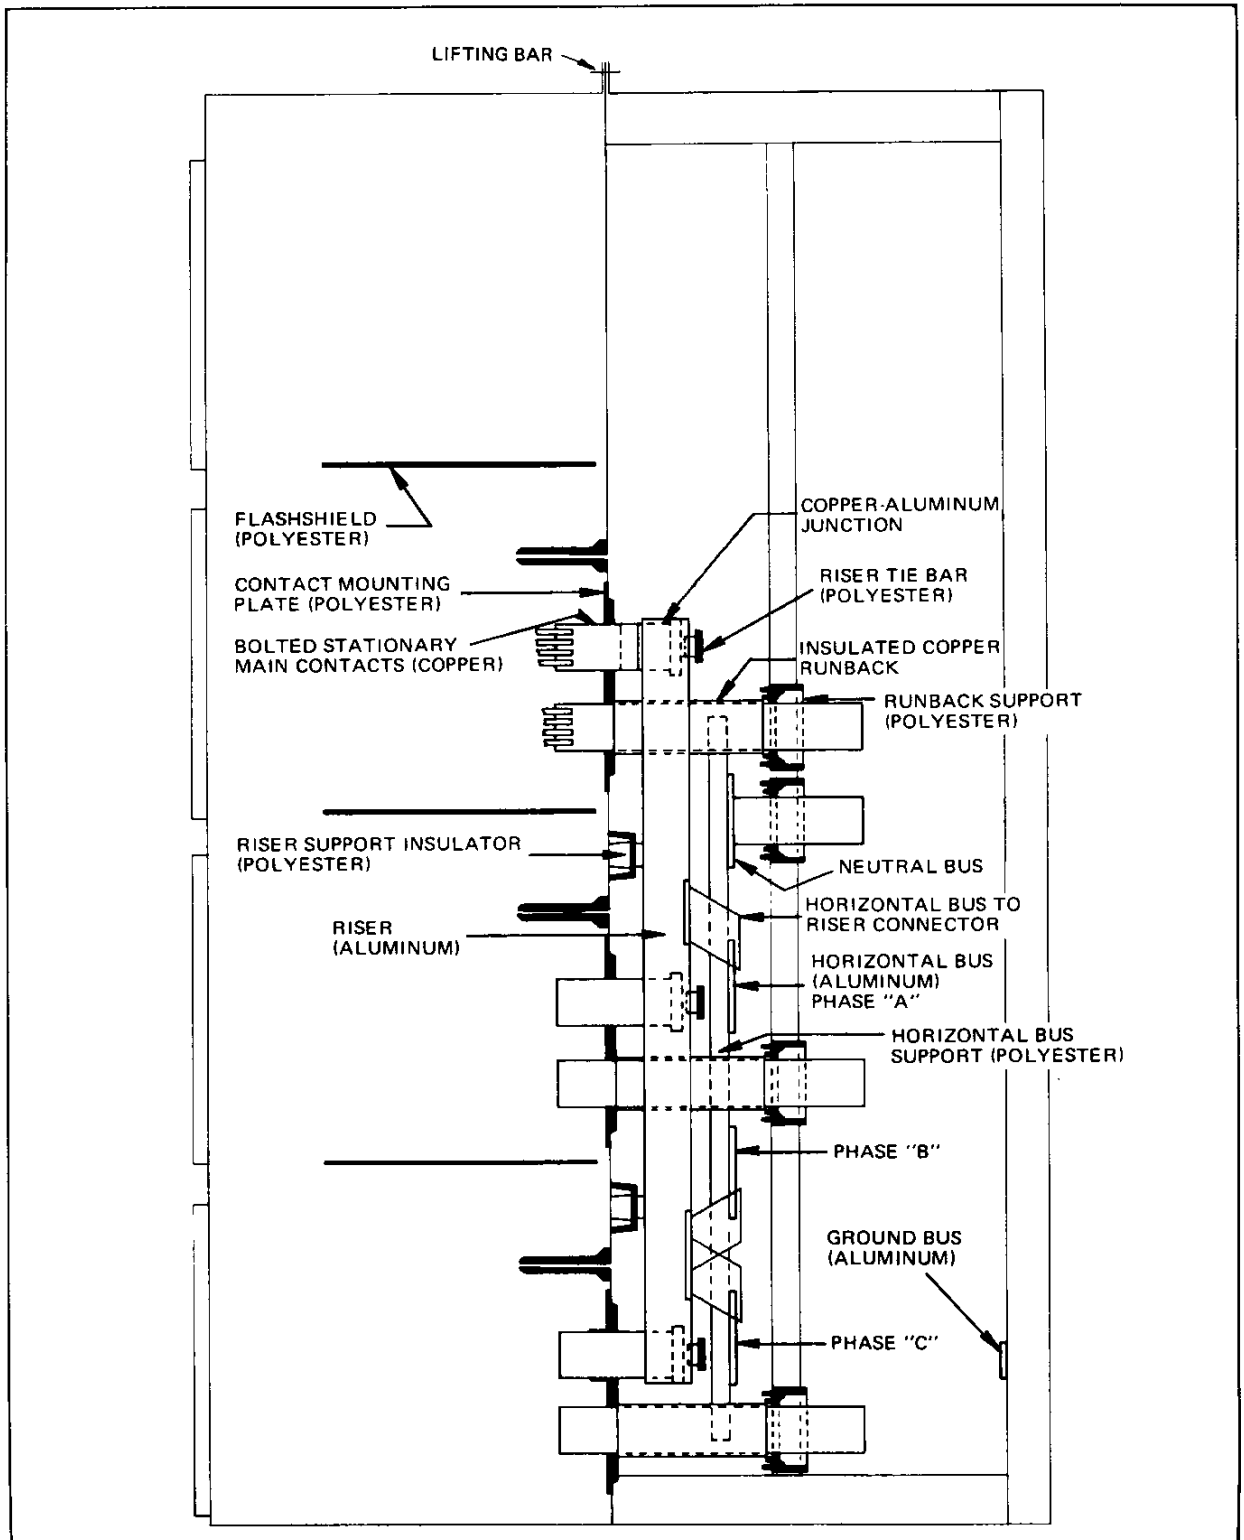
Bus and Insulation Details 1600 Amp Aluminum
